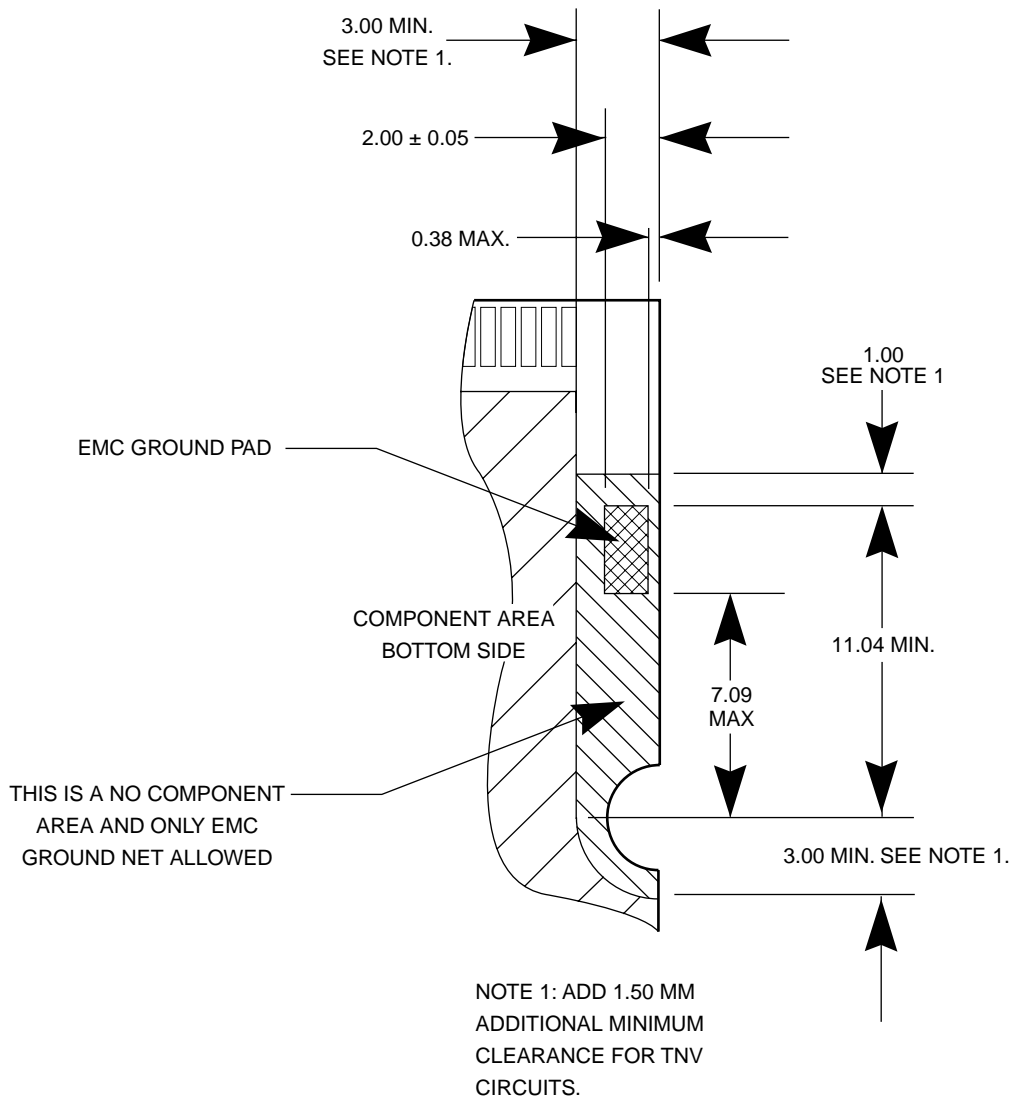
Type III PCB, Bottom Side, Detail D (2X)
